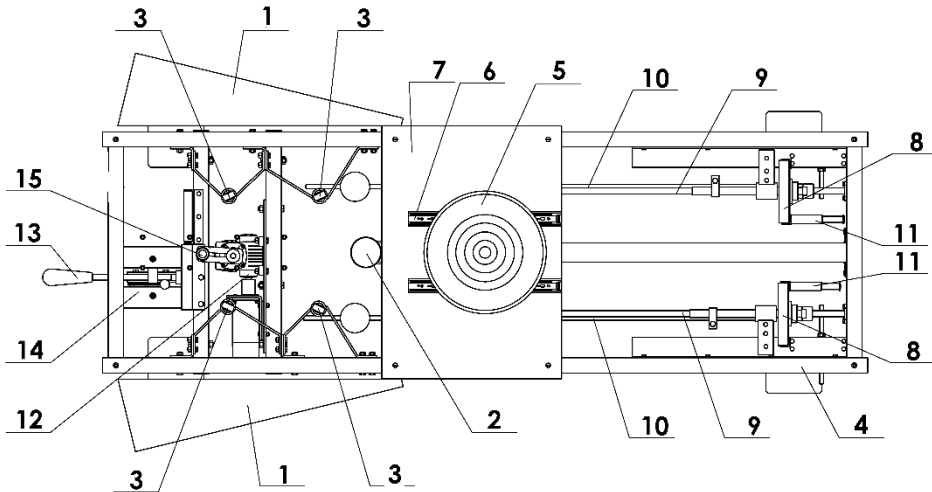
Prototype of spinal actuator (Lithuanian patent number 6585): 1 – oscillating plate; 2 – sliding and rotating circle; 3 – pedals; 4 – electromechanical gear; 5 – frame; 6 – removable springs
